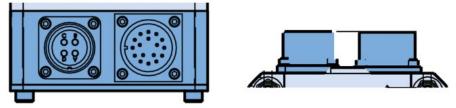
Drawing of box mount connectors used on some Tolomatic IMA Actuators.
